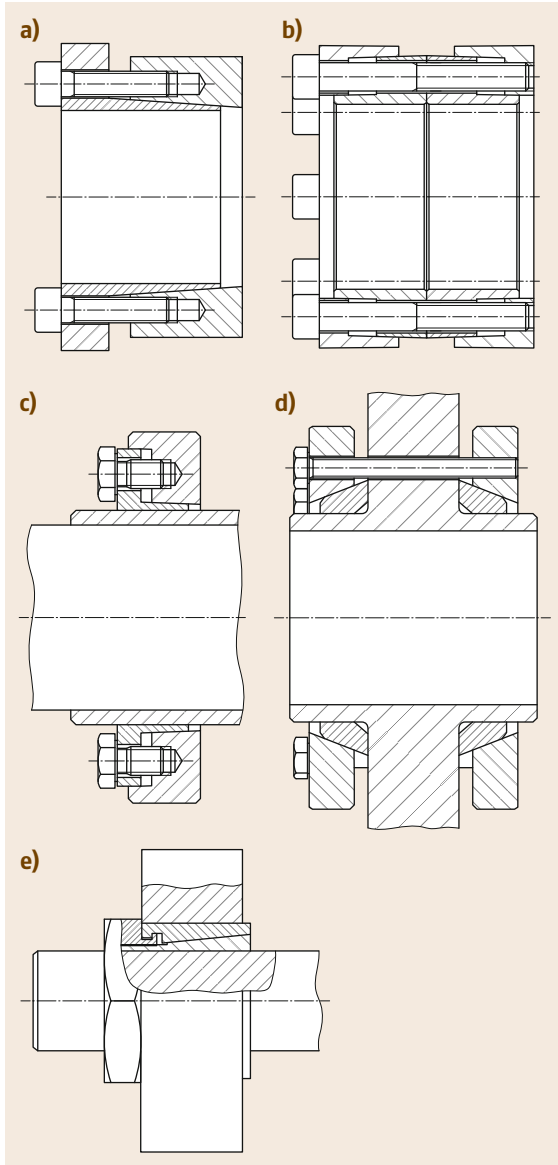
e Other clamping sets (selection): (a) self-centering internal clamping set (make: Klempex), (b) internal clamping set for transferring large torques (make: Stüwe), (c) clamp ring (make: Stüwe), (d) two-piece clamp ring (make: Stüwe), and (e) clamping set with hexagon nut
